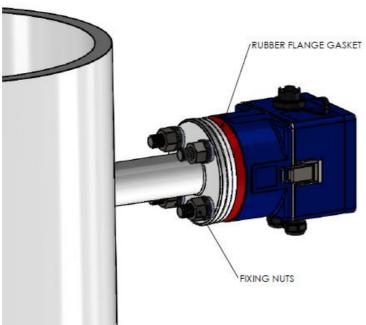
Air-Purge Body mounted to flange with the rubber flange gasket
